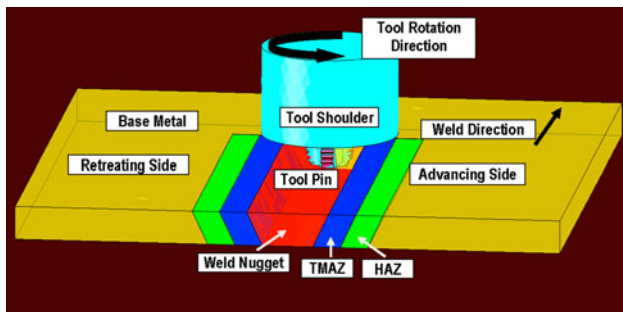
A schematic of the friction-stir welding (FSW) process used to fabricate a flat-butt joint. Four typical microstructural zones associated with the FSW process are also labeled
